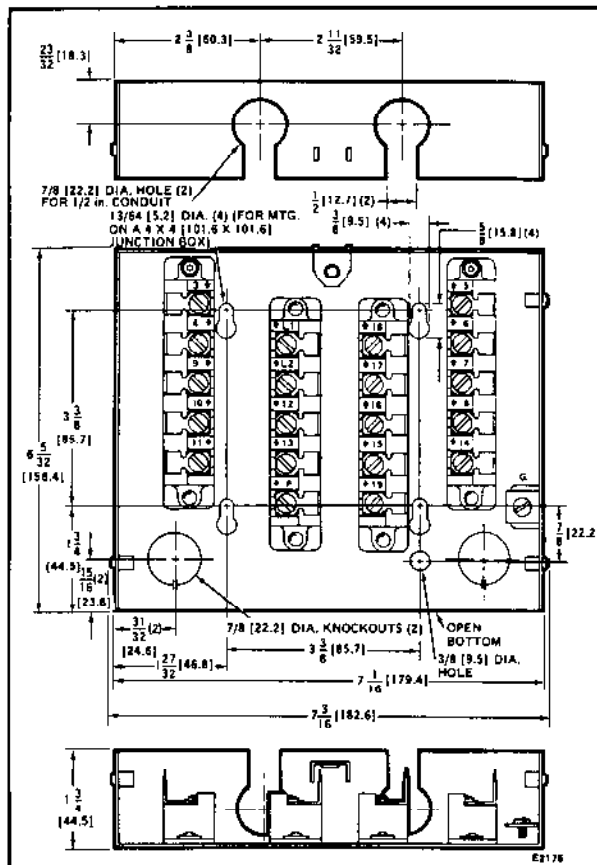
MOUNTING DIMENSIONS OF THE 3-SIDED 833-1966 SUBBASE (in in.).
